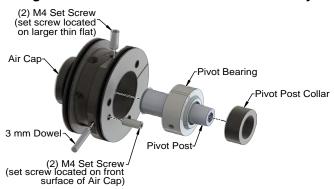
Air Cap Removal from Rear Housing Assembly
